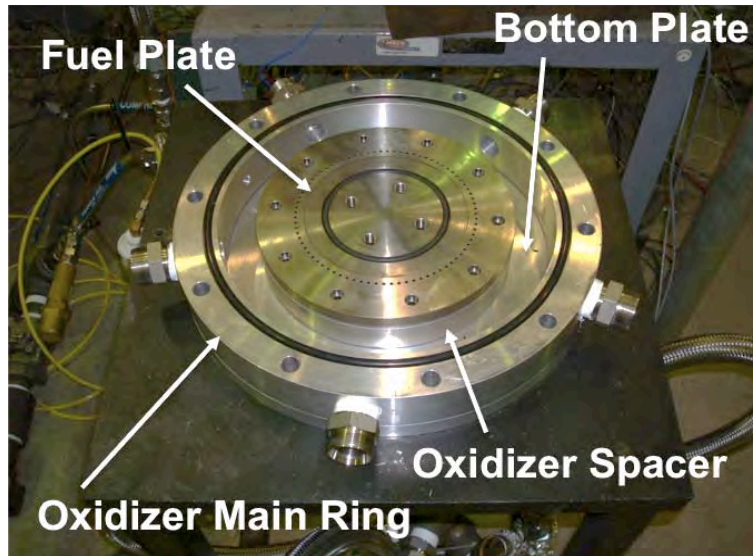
RDE with bottom plate, oxidizer spacer, oxidizer main ring, and fuel plate installed
